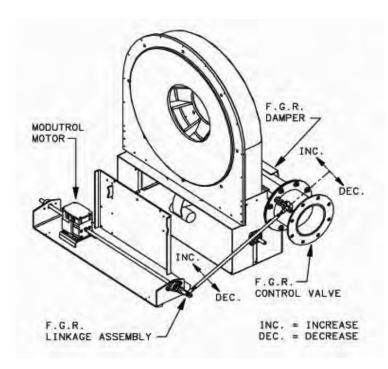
FGR Control Valve and Air/FGR Damper
